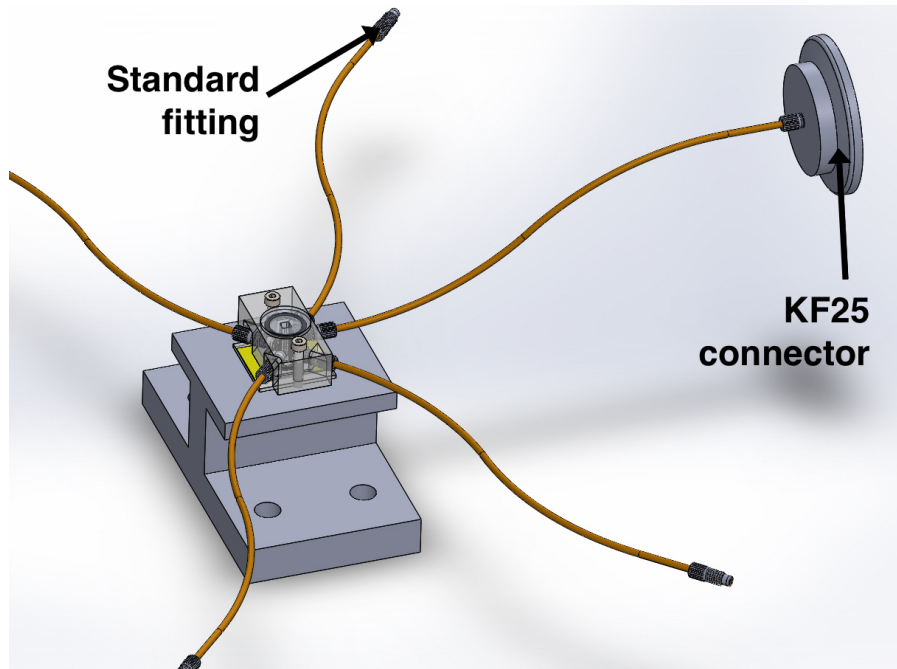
SolidWorks view of the complete interface after assembly. The KF25 connector can be joined to Pfeiffer Hi Cube vacuum pump tubing, while the fittings can be connected to standard fluidic equipment.
